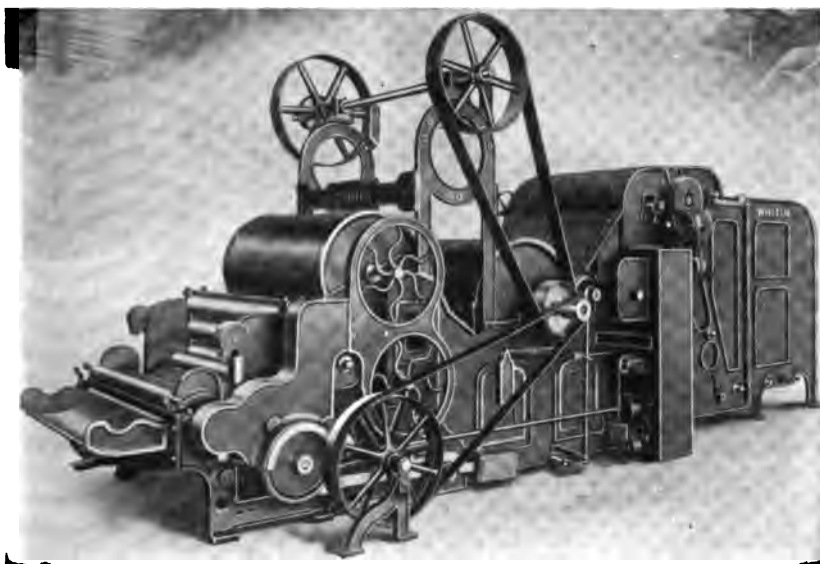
SEC. 10rr.—Breaker lapper equipped with automatic feed and lapper.
